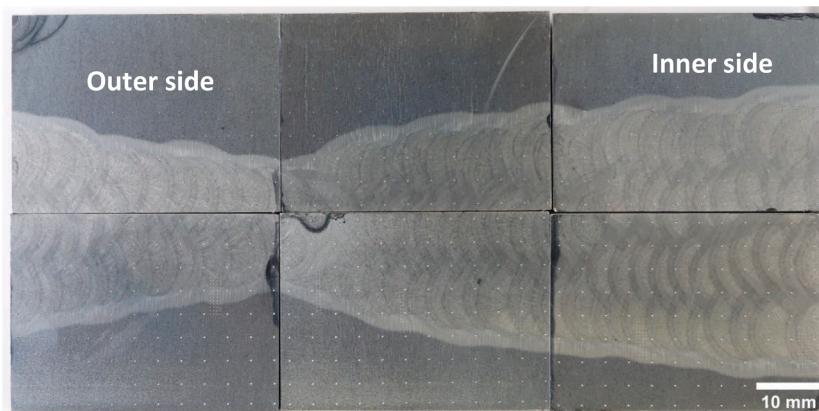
Through-thickness cut of the Barsebäck RPV multilayer weld.
